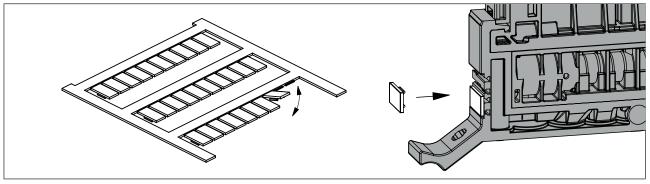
Marking the valve slots using MultiCard format device markers: After printing, remove the device markers from the sprue and clip them onto the valve.
